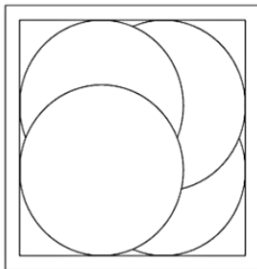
Front View drawing of spiral-packed channel (XY axis)
